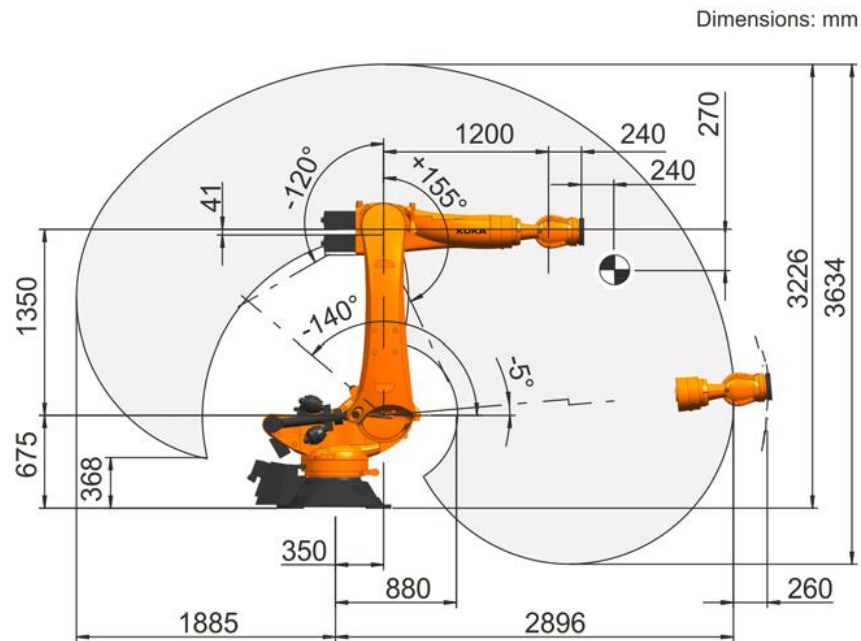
Kuka kr240 r2900 dimensions and workspace [[4]]
